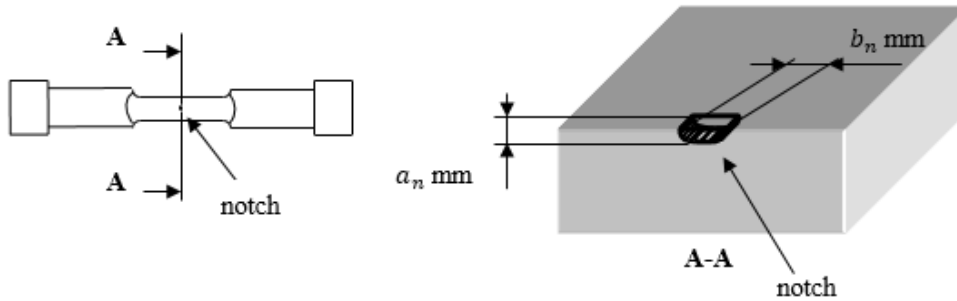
Sketch of an EDM notch on a Kb test specimen, used in studied tests. Courtesy of GKN Aerospace Engine Systems.
